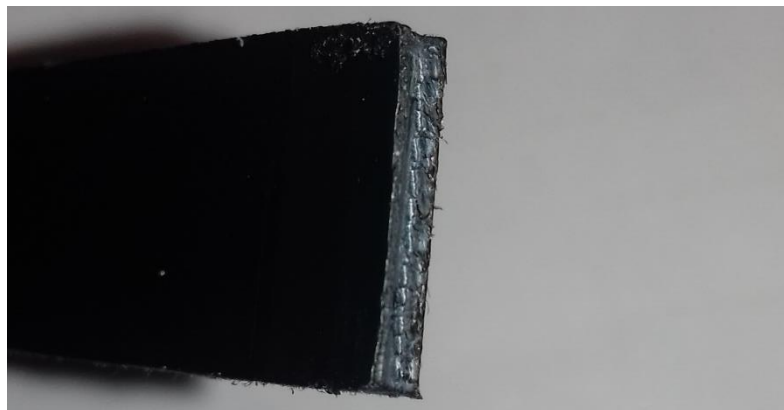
Brittle fracture zone specimen 4 test S(3,3).
